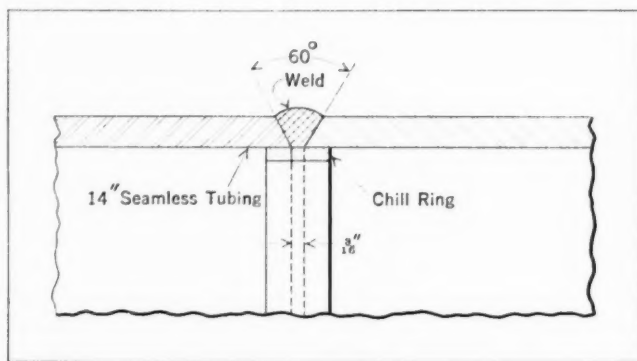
Section of Roll-welded Joint of High-pressure Steam Pipe
